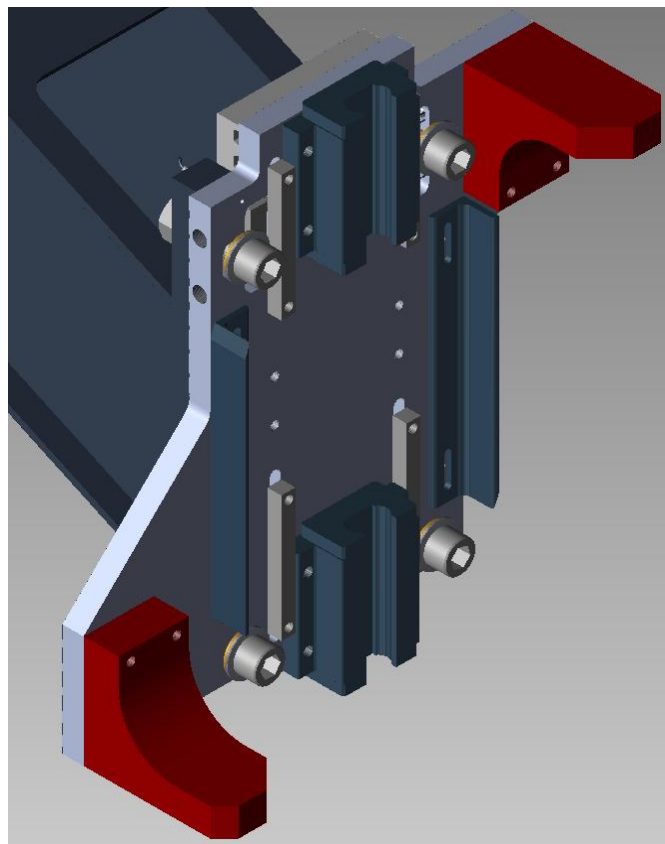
Linear Test Bed Carriage Attachment Point
